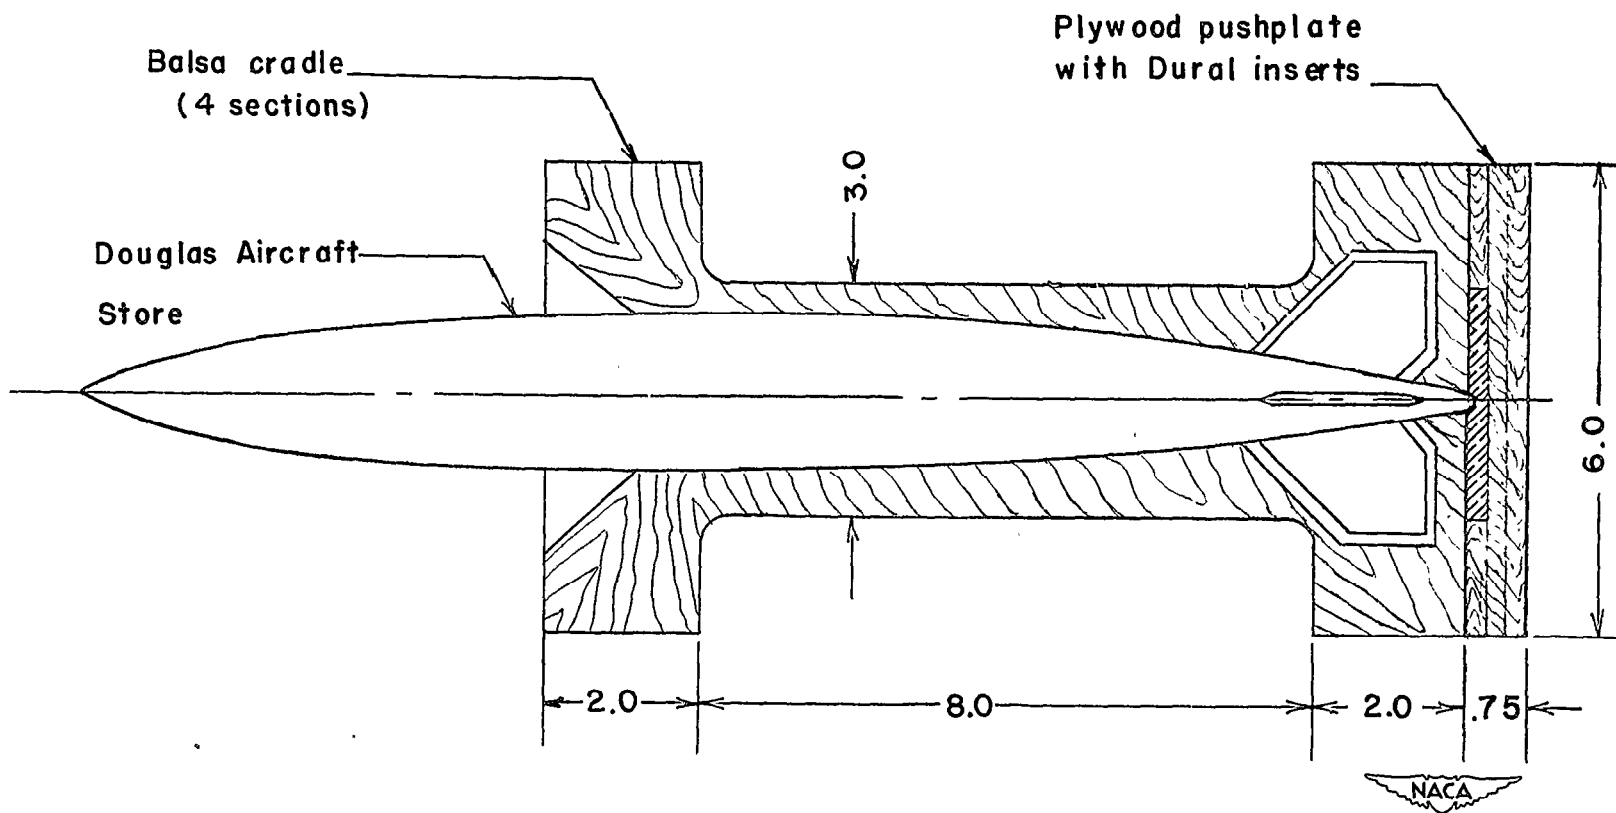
Douglas Aircraft store test assembly. All dimensions are in inches.
